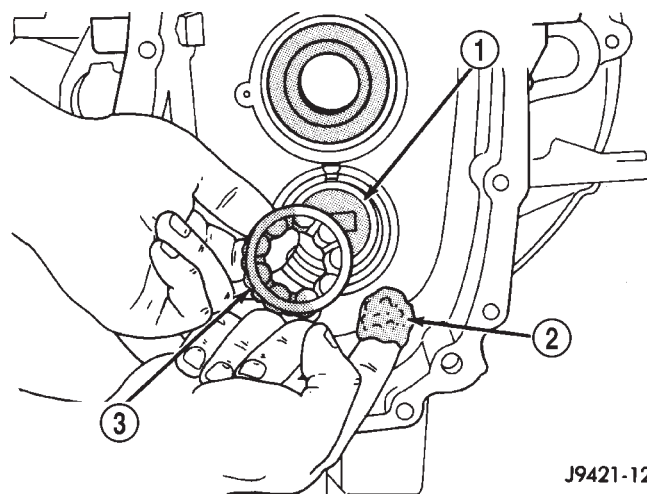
Lubricating/Positioning Countershaft Front Bearing
